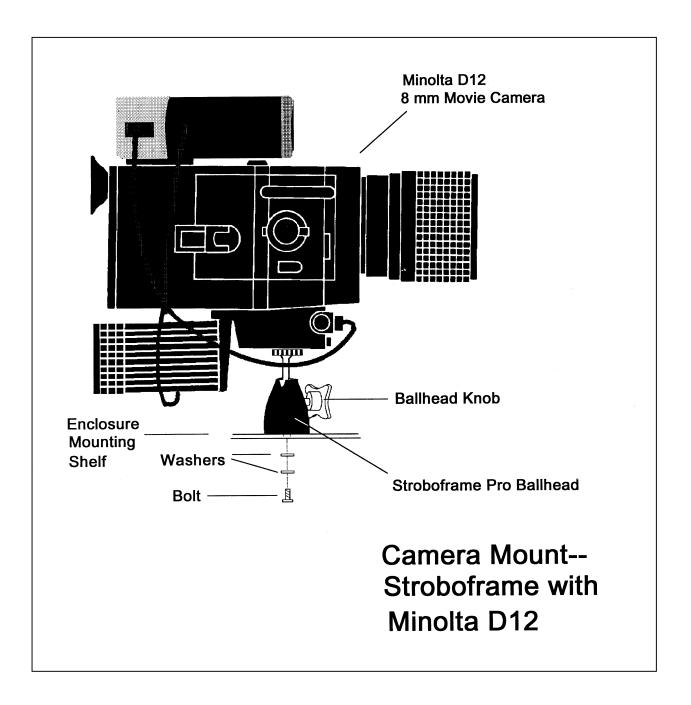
Automatic 8 mm Camera System Tripod Assembly.
